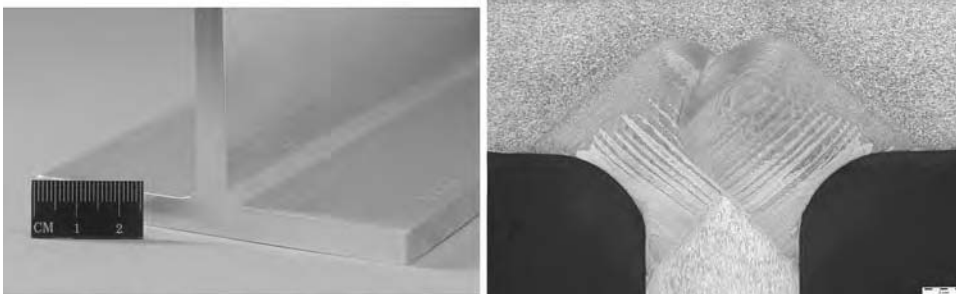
Surface finish and weld profile possible with stationary-shoulder friction stir welding in fillet welding. Courtesy of Jonathan Martin, The Welding Institute
